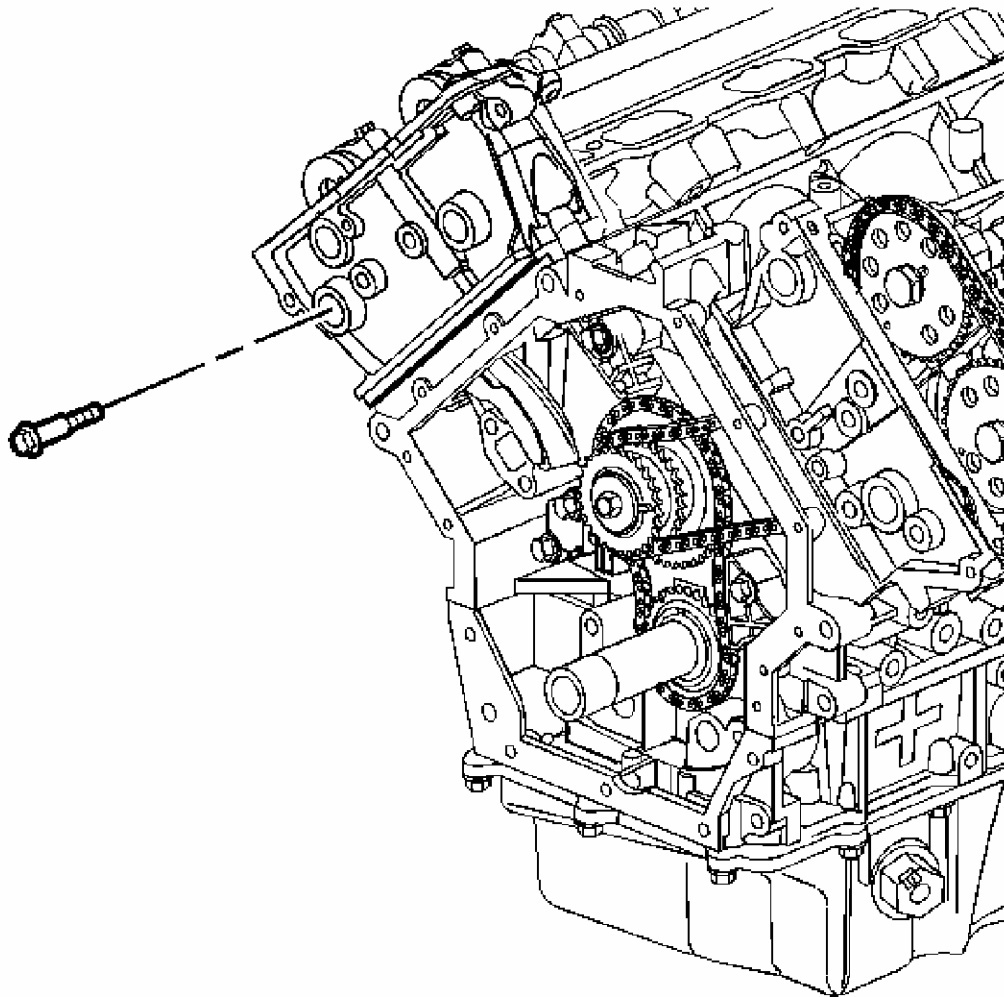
Identifying Right Secondary Camshaft Drive Chain Shoe Bolt
